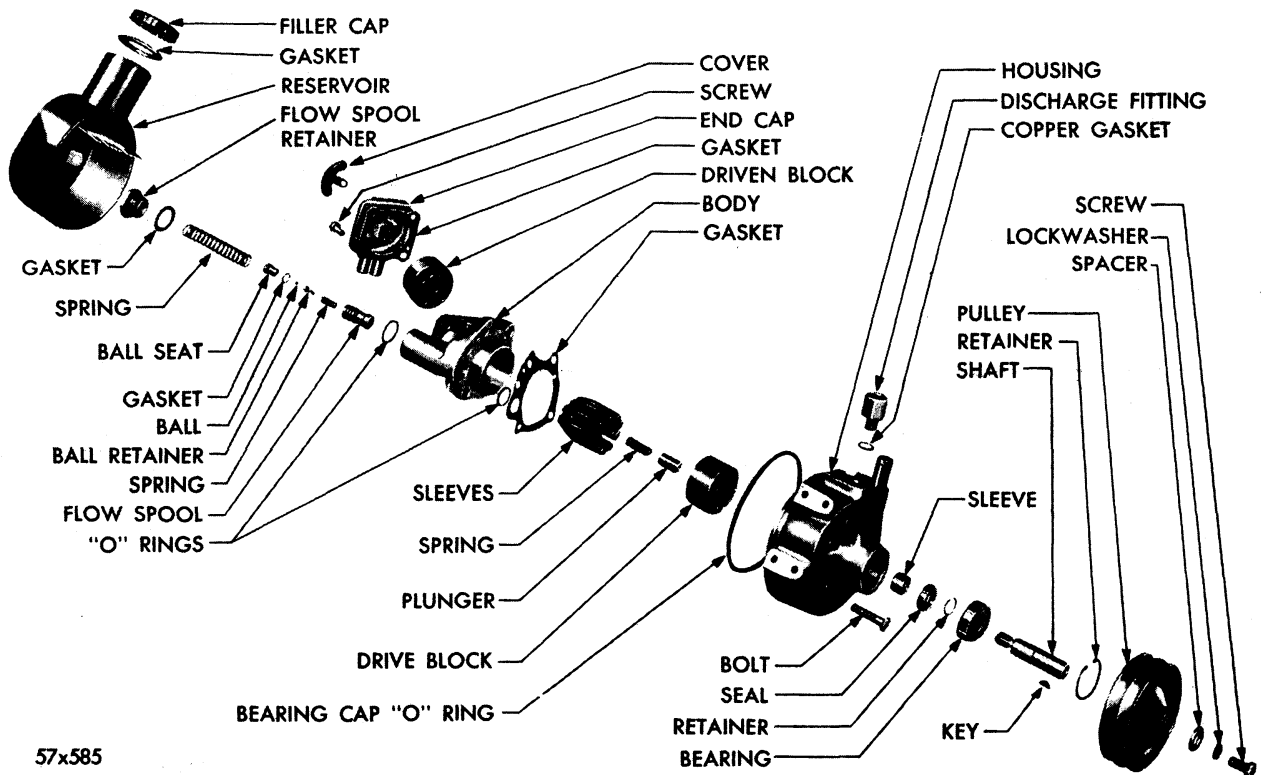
Power Steering Oil Pump (Disassembled View)
